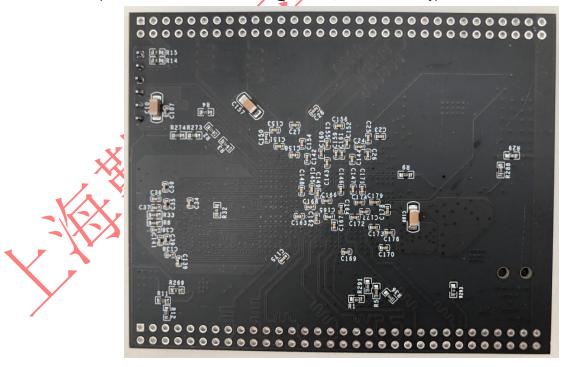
QMTECH XC7A100T Core Board Bottom View
